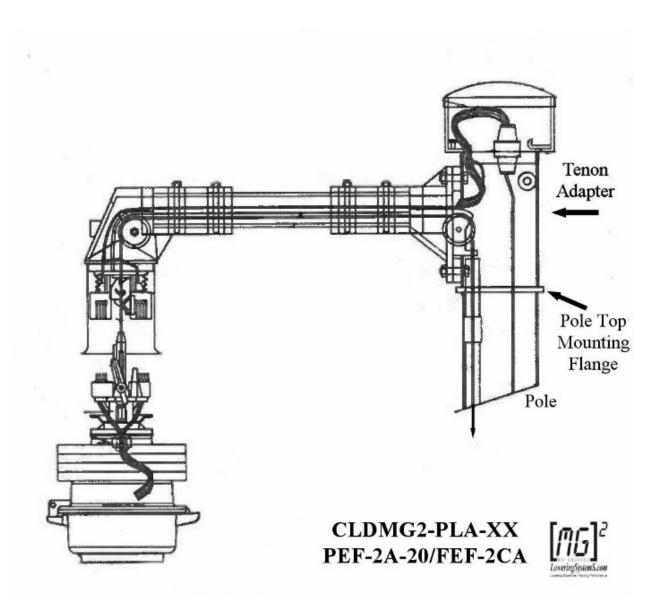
MG² Internal-Type CLD Design (Image courtesy of MG²)
